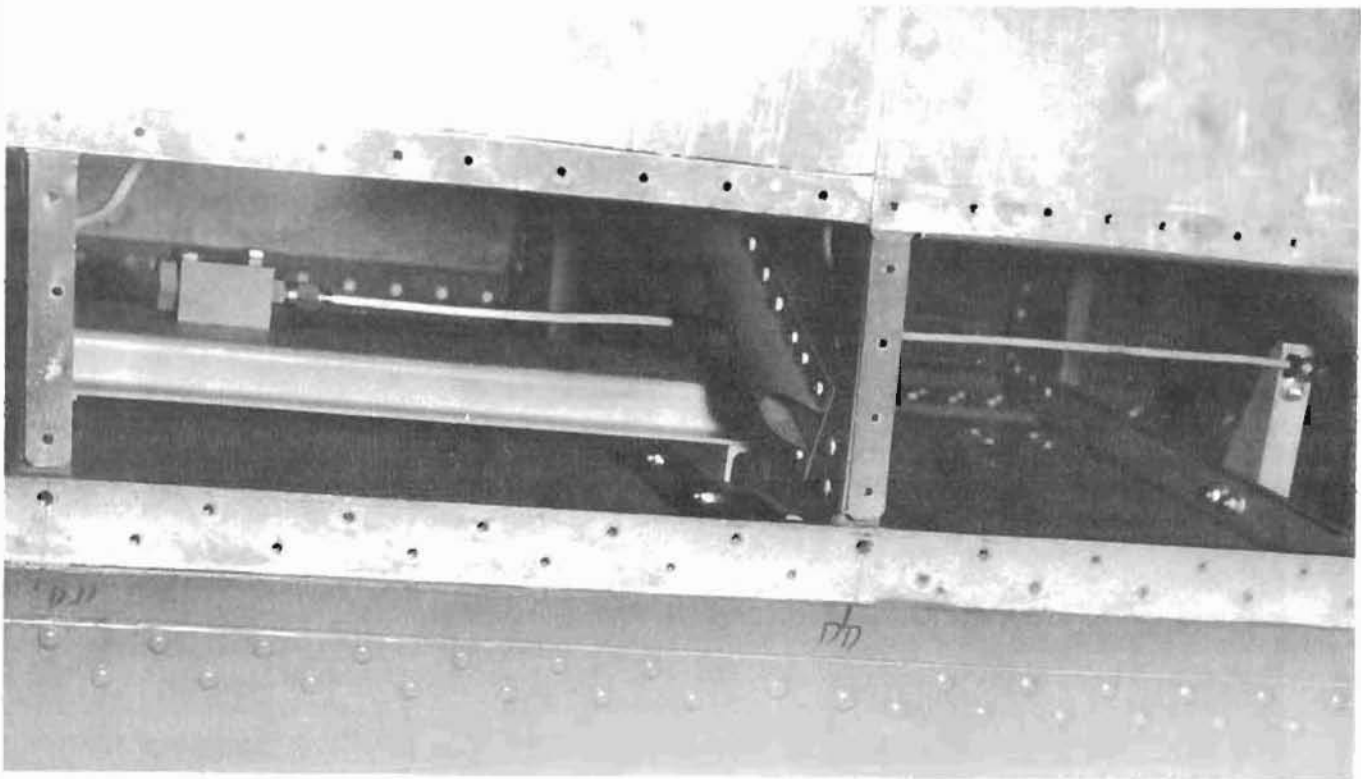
Right Wing Outboard Cable Switch (Anchor End)
